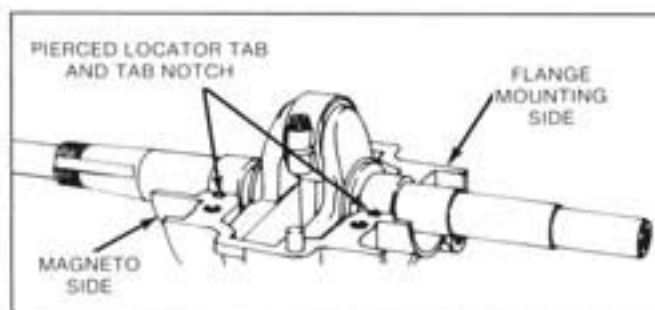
Crankshaft and Piston Assembly Properly Installed
